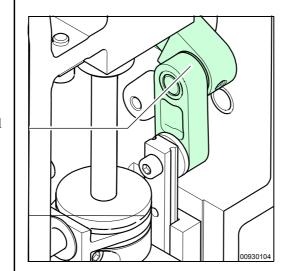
K head, connecting rod bearing, crank - presser foot drive
